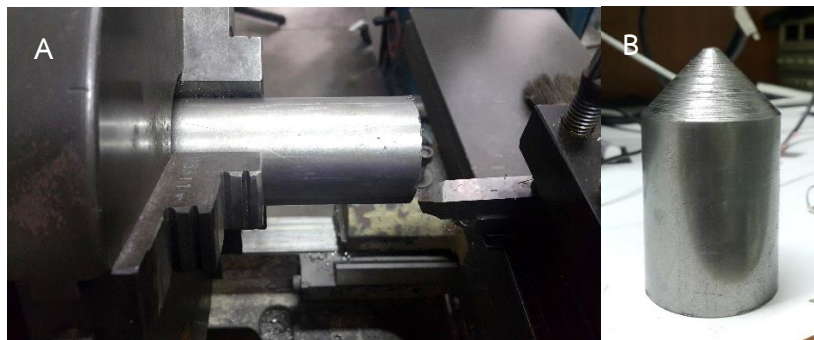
Conical wedge (A) before and (B) after lathe turning.
